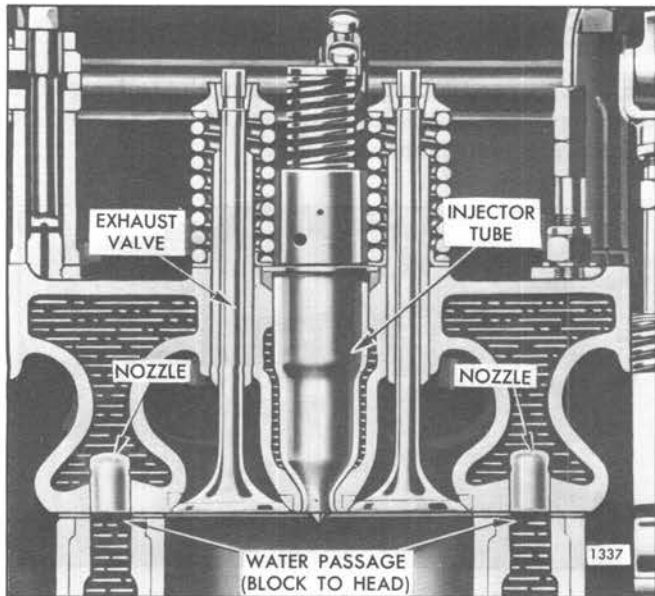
Coolant Passages Around Exhaust Valves and Fuel Injectors
